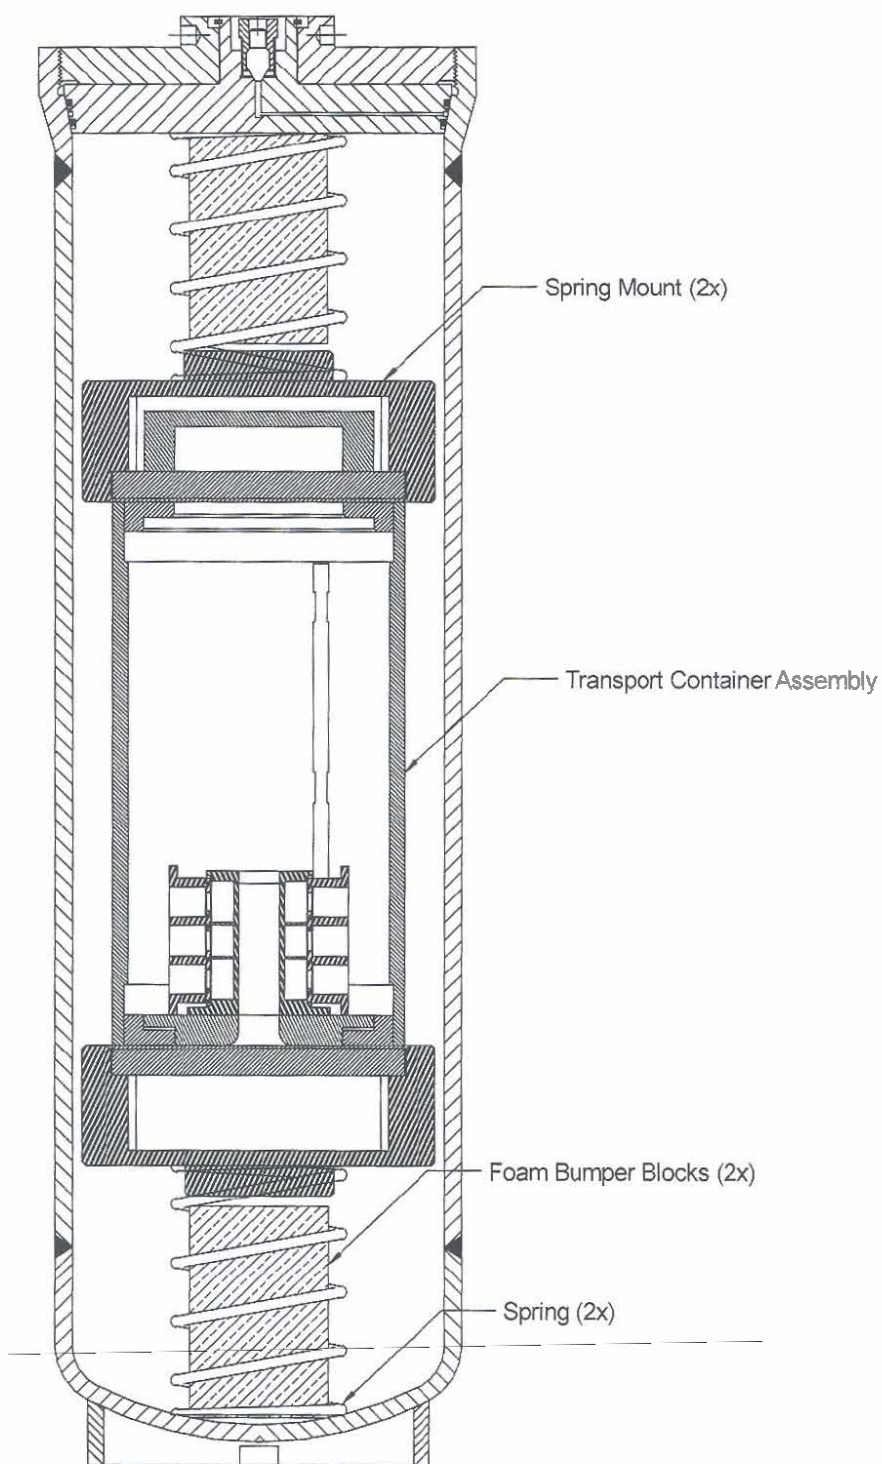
6CV w/ICE Apparatus Transport Container Assembly
